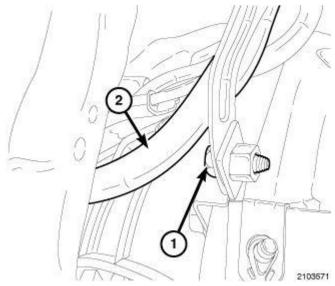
Transmission Fill Tube And Bolt Courtesy of CHRYSLER LLC
